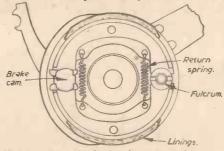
How the brake shoes, operating cam, fulcrum, etc., are mounted on the brake plate.
